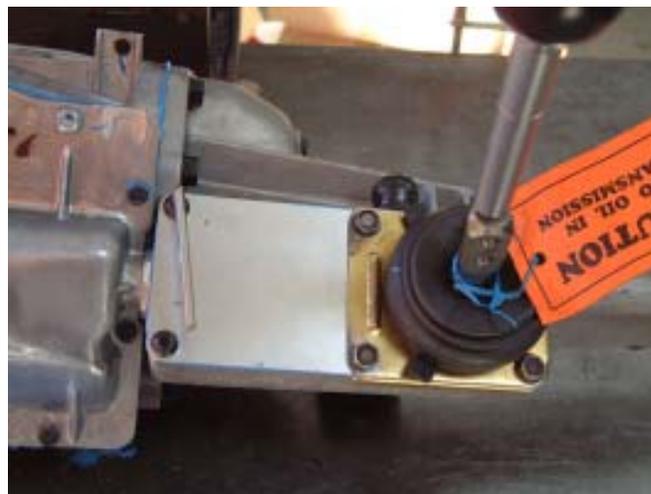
Here we have the shift box assembly complete. The vent bulb is installed and the bushing for the shift lever is greased and inserted in the rear shift block. RTV has been placed to seal this area.
